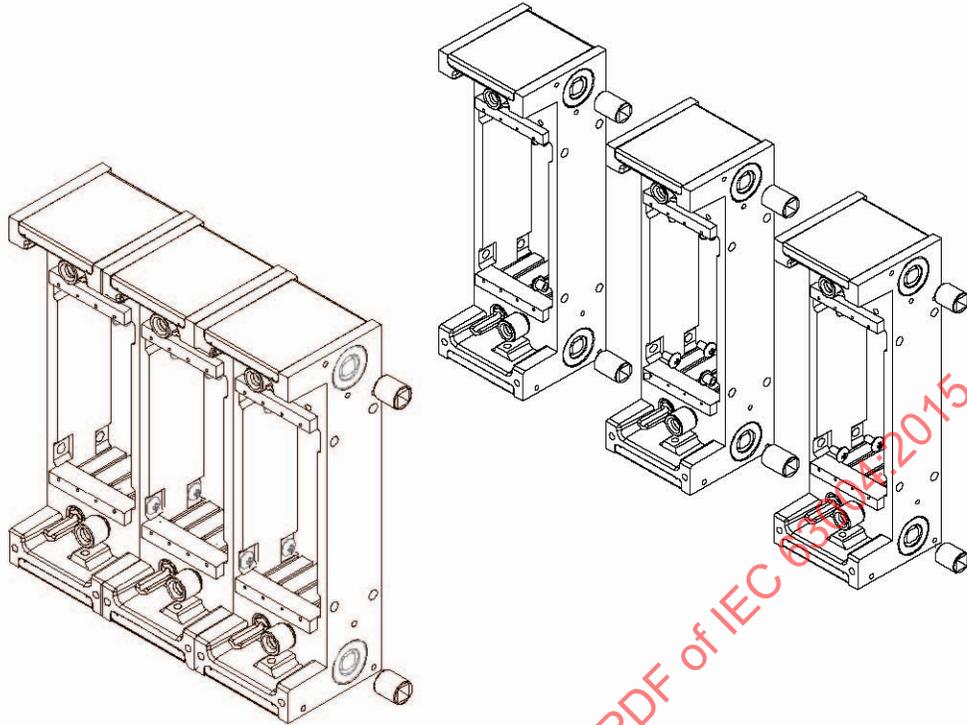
Segmented framework receiver layout design, perspective view, with connector mount spacing of 15.24 mm (0.60 in) and nonconnector slot for frame rib at 76.2 mm (3.0 in) spacings
